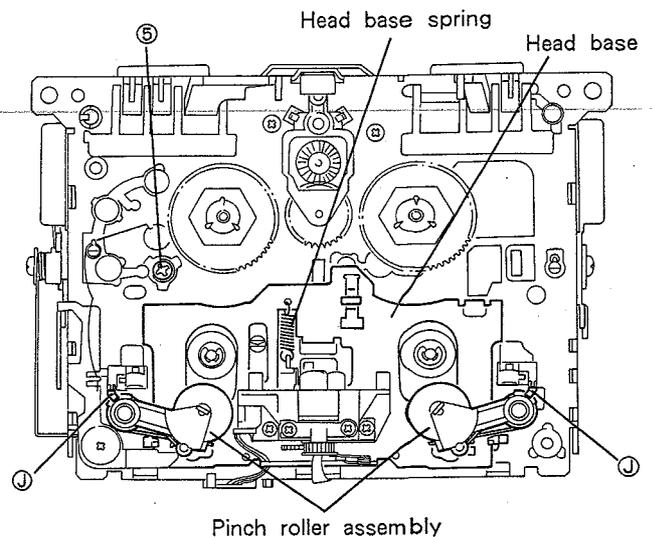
Removal of Head Base and Pinch Roller Assembly
